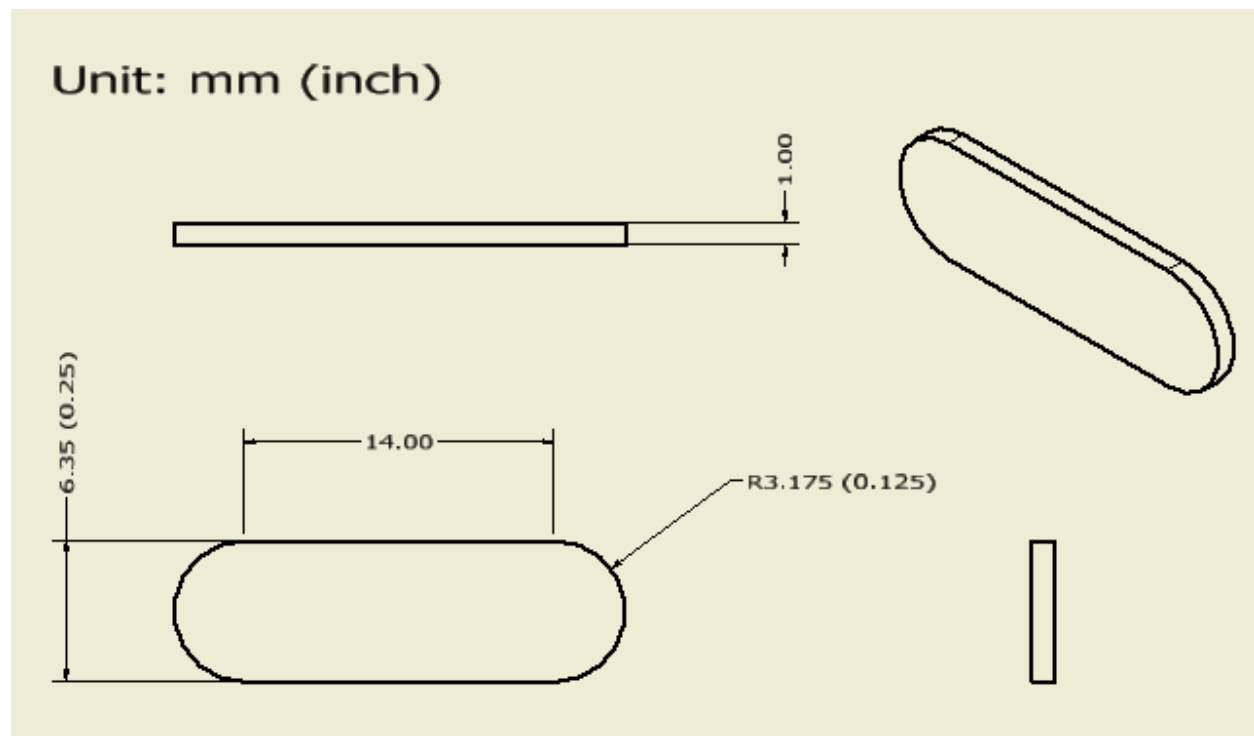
CAD drawings of cooling channel welding plate for the vertical trench test
